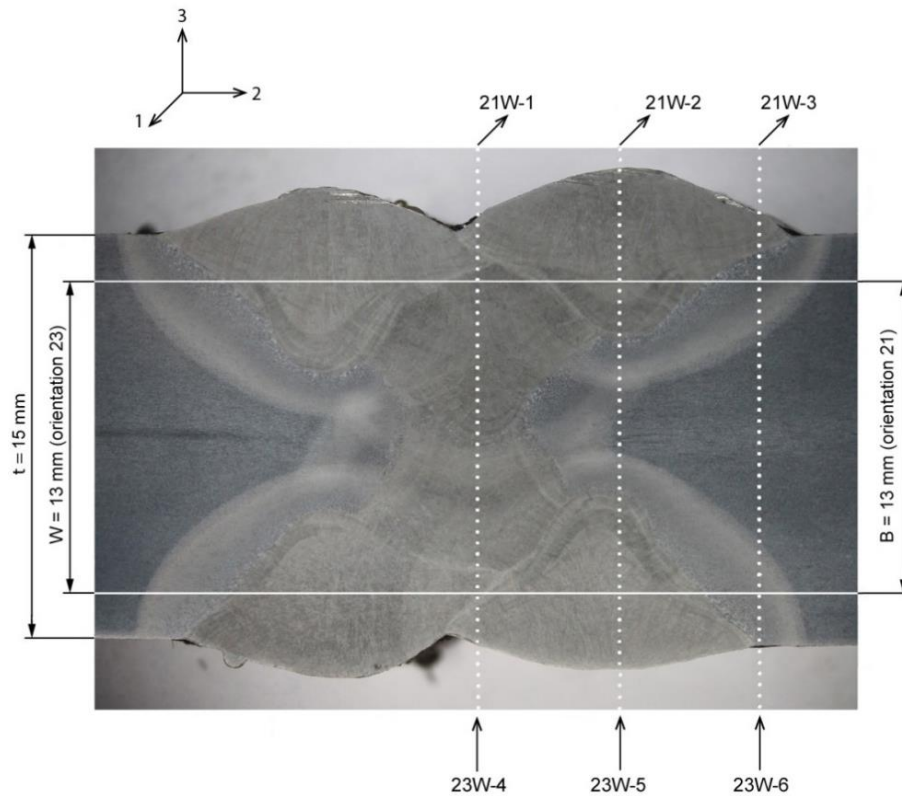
Notch locations and crack paths in the welded joints.
